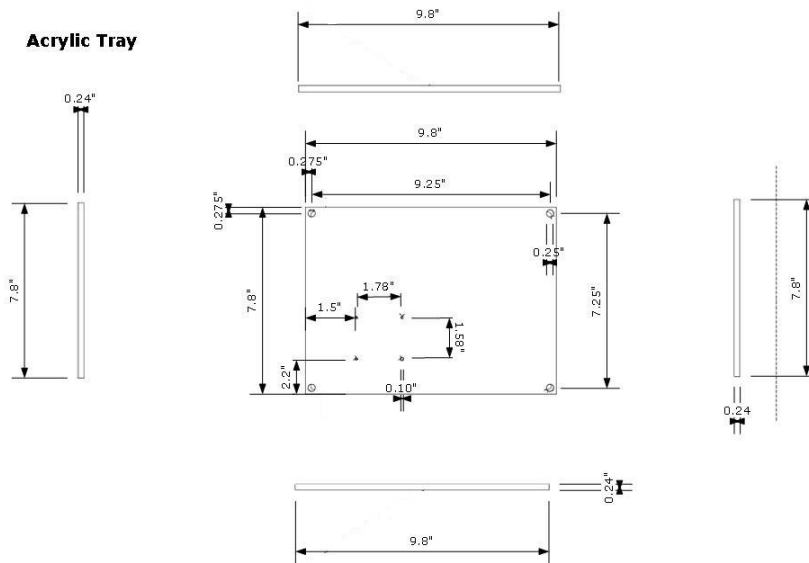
Dimensions of the Acrylic Tray placed inside the Faraday cage
